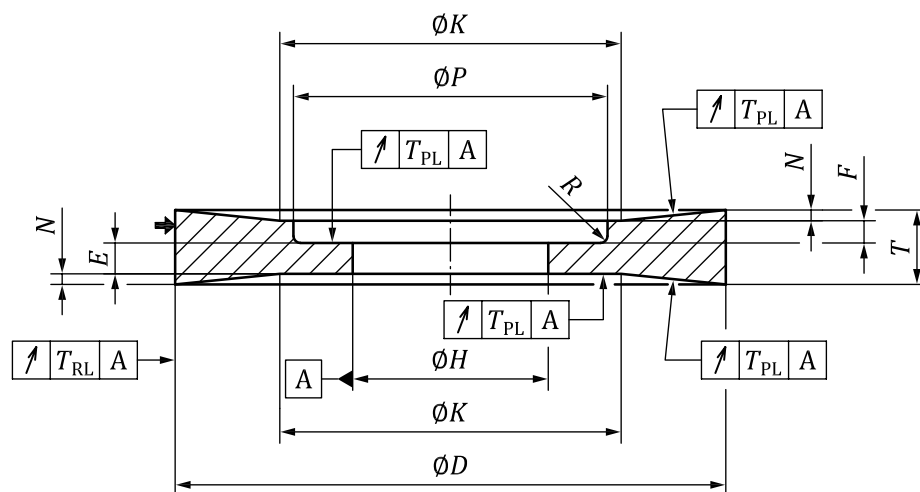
Grinding wheel, relieved and recessed on one side, relieved on the other side (Type 25)
